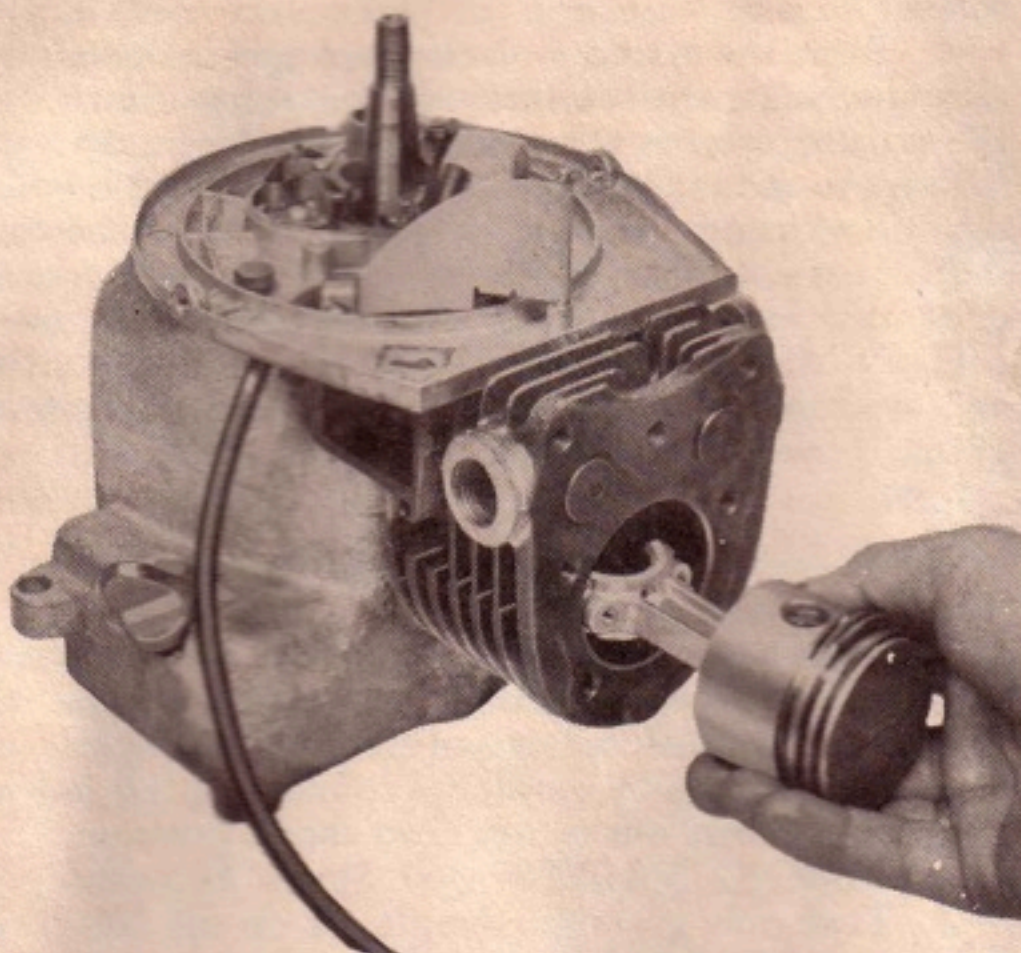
Piston and Rod—The connecting rod MUST be installed with the oil hole in the rod towards the bearing plate
